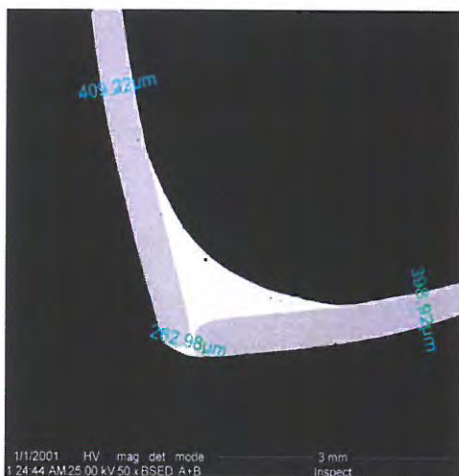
Macro-graphic transversal section aspect for brazed corner sample (sample „L”) 50X.
